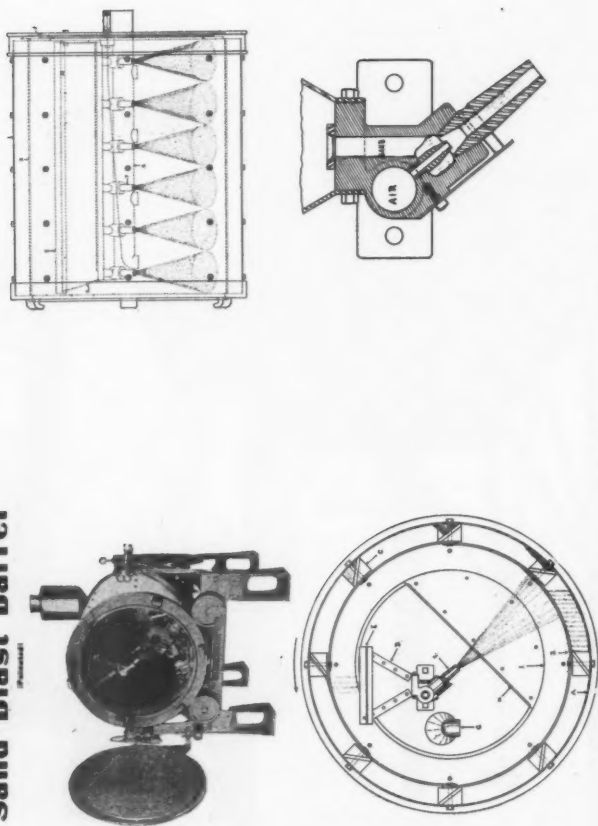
NEW HAVEN SAND-BLAST BARREL.
